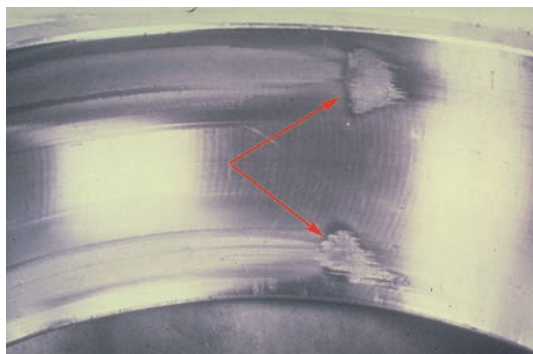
Smearing on the outer ring raceways of a spherical roller bearing
